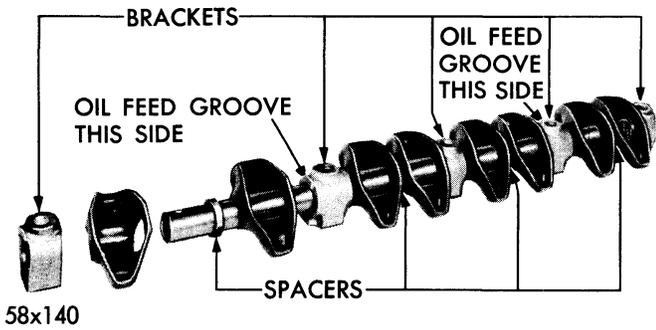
Rocker Shaft Assembly—350 Cubic Inch Engine
